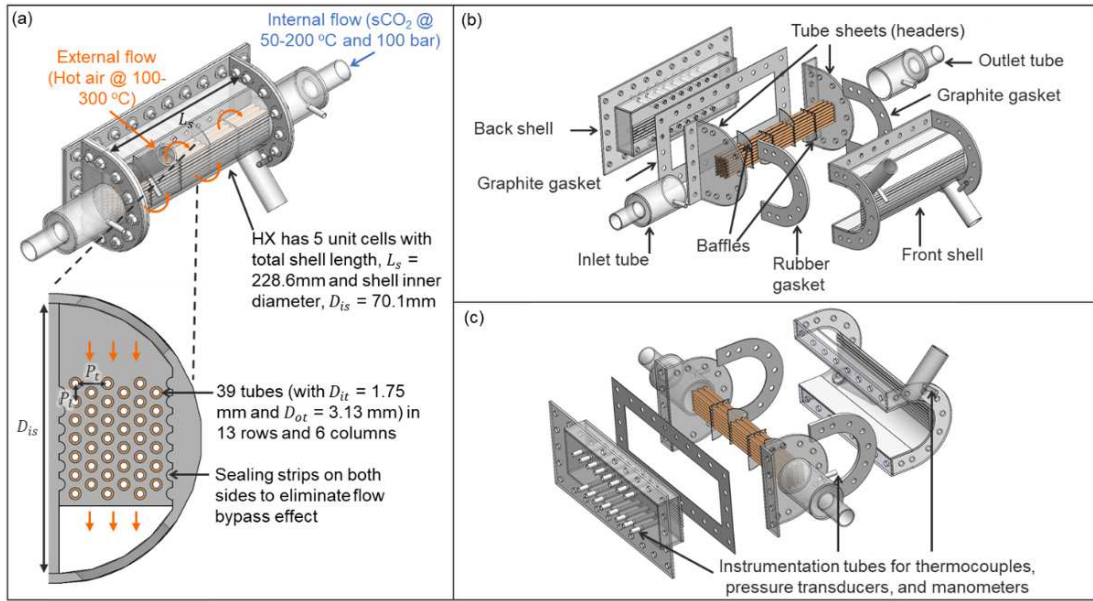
Schematic of the designed and fabricated MT-STHX: (a) 3D schematic of the HX assembly, (b) picture of the HX assembly, (c) 3D schematics in exploded view. (Reproduced with permission [51])
